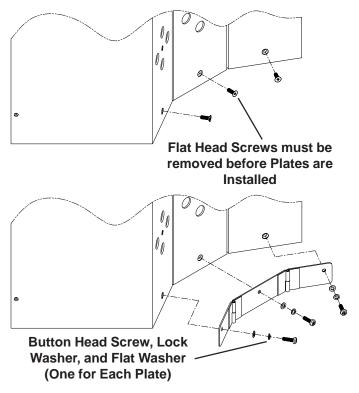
Assembling the Rear Hinge Plates (3 x PX2122, 30° Splay Shown)
